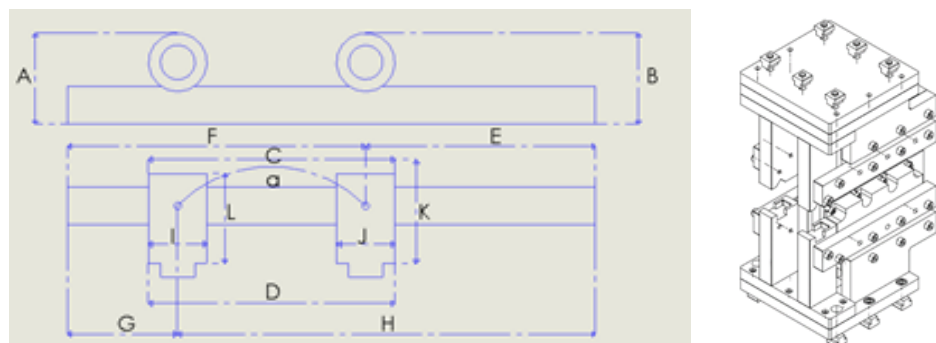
Schematic diagram of the measurements of the specimen (letter “a” designates the angle between the specimens) and view of the exemplary welding tool (right)
